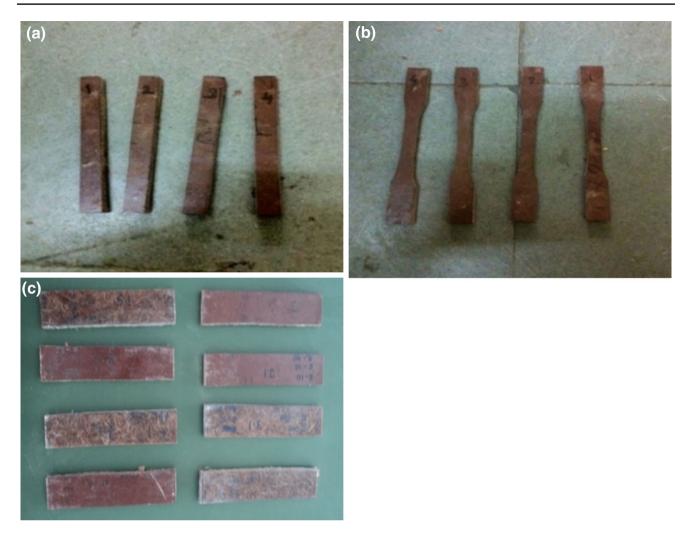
Samples cutting for flexural testing (a), tensile testing (b), and compressive testing (c)
